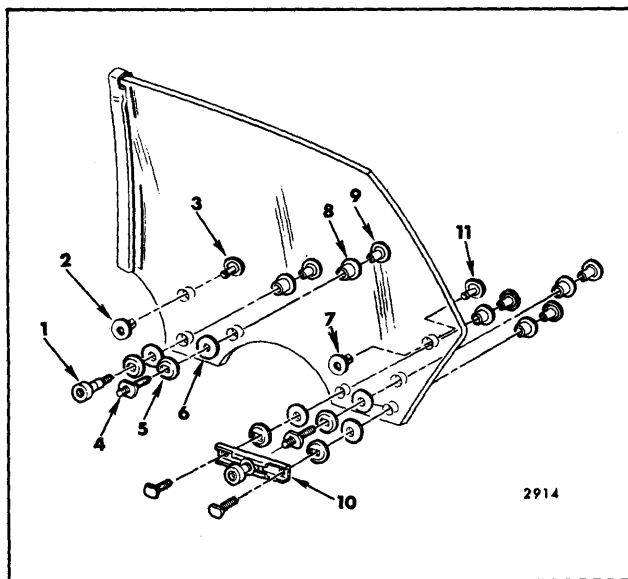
Rear Door Window Assembly - "A-39" Styles
